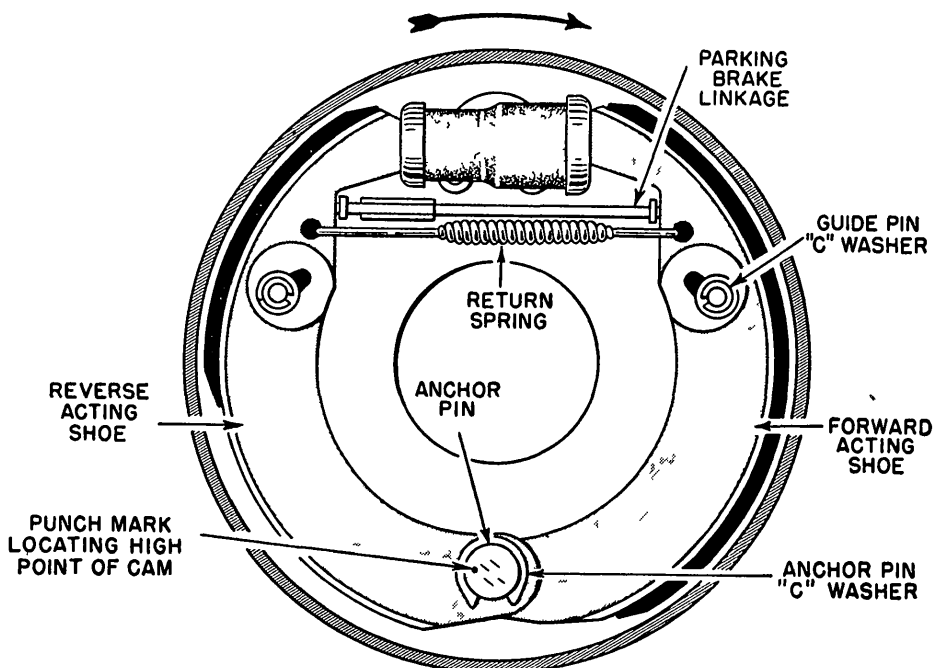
Lockheed hydraulic double piston cylinder brake with a single eccentric anchor pin. Diagram shows right brake
